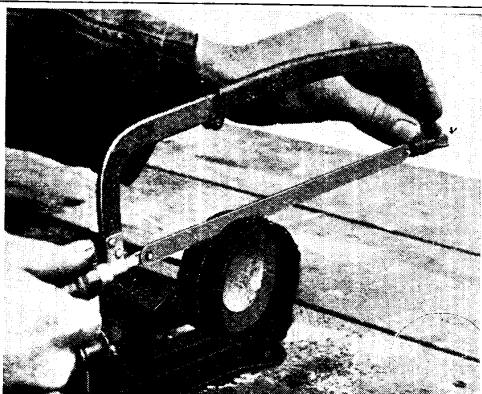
Tubes are best cut with a hack-saw, using a wooden liner as a support for the tube. Care must be taken to fill the inside of the tube completely and not to screw up the vice too tightly
